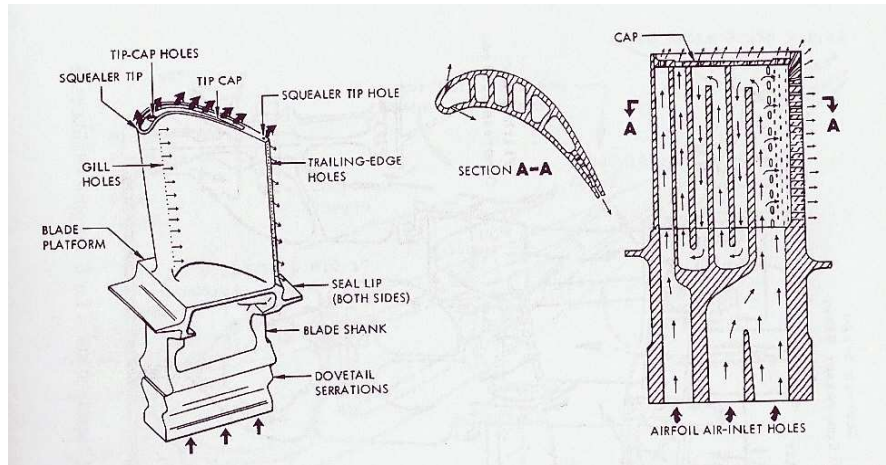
(a): High pressure turbine rotor blade internally cooled for GE CF6 engine (Treager, 1979)
